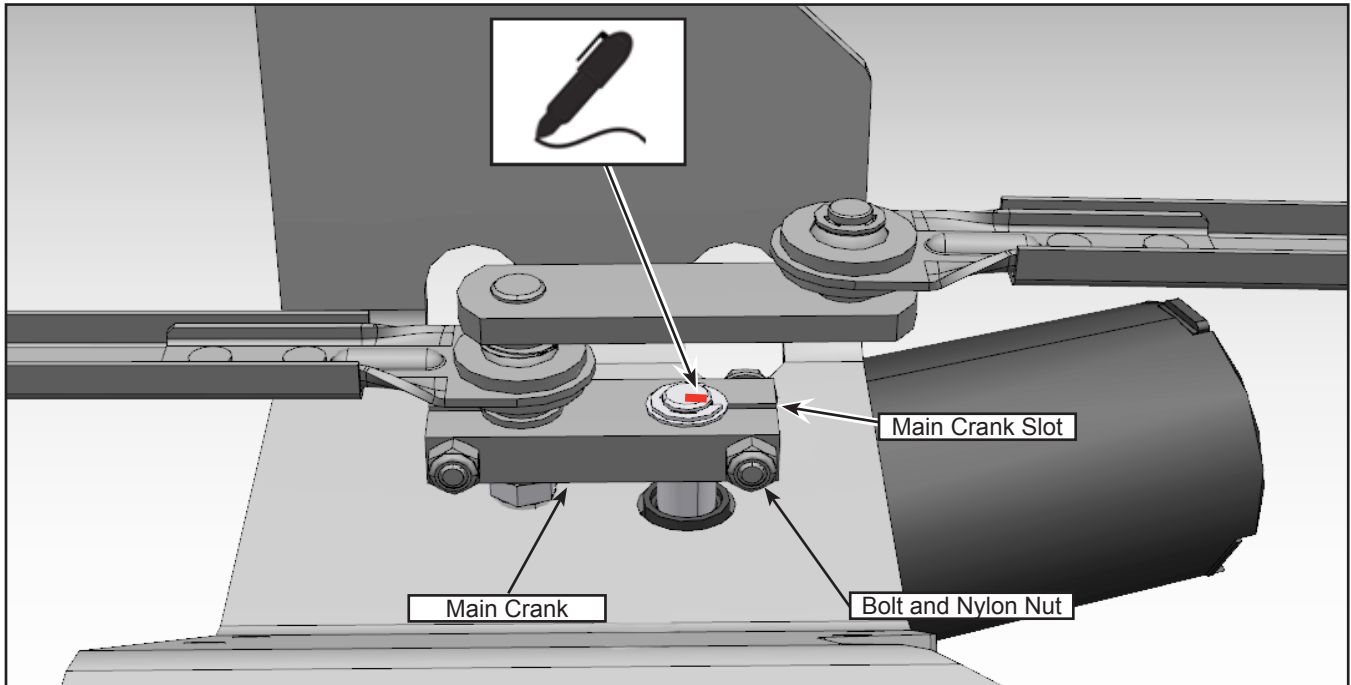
Mark the Position on the Shaft and Remove the Main Crank
